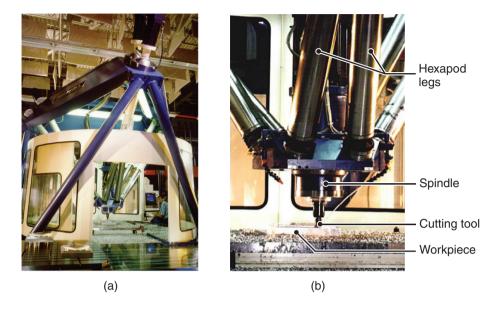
(a) A hexapod machine tool, showing its major components. (b) A detailed view of the cutting tool in a hexapod machining center. *Source:* National Institute of Standards and Technology.
